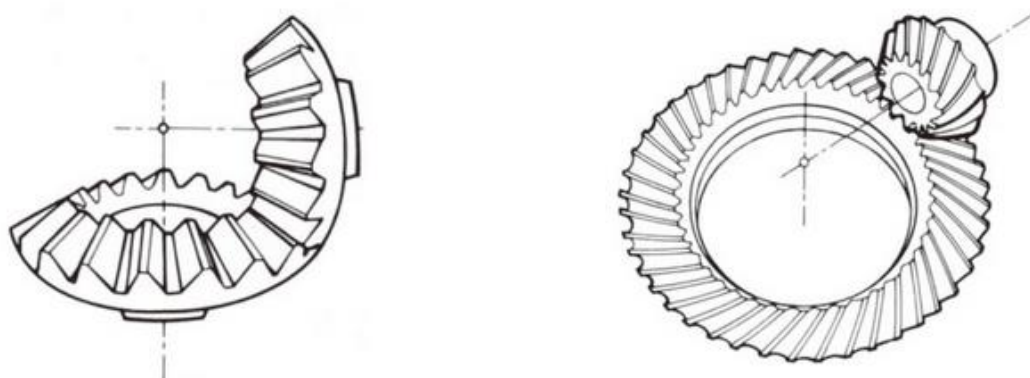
straight and spiral bevel gear (KHKGEARS n.d.).
